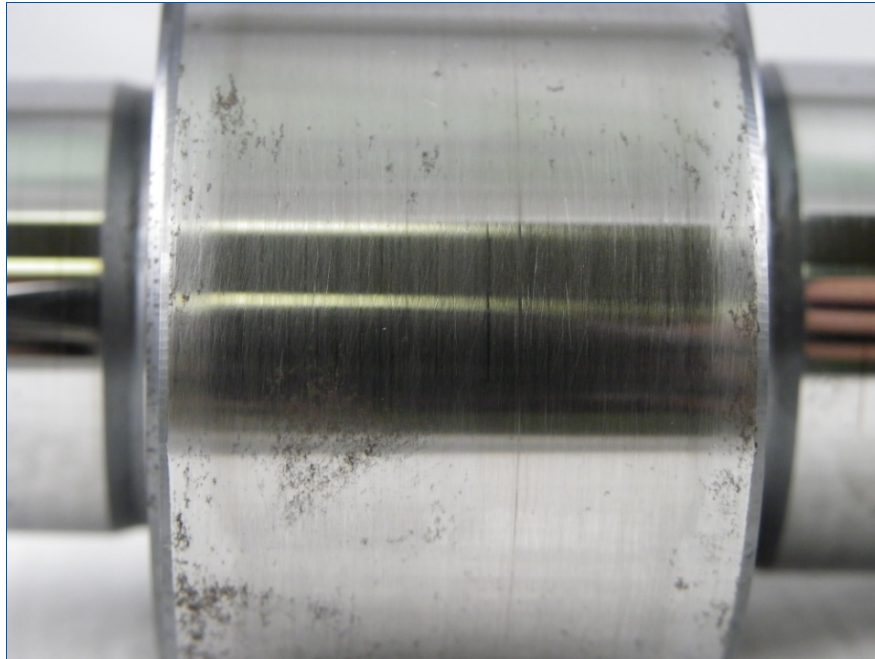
AF7938 50/50 JP-8/HRJ, HPCR Pump Camshaft, Lobe Surface Close-Up
